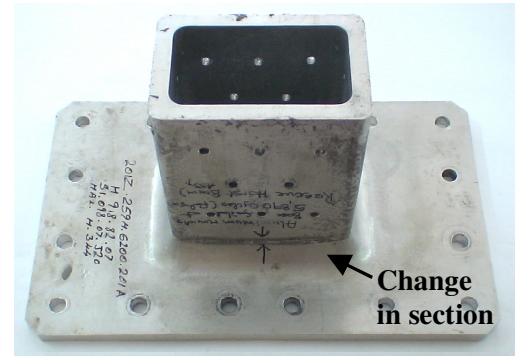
Photograph of the part adapter that had failed during the fatigue test
